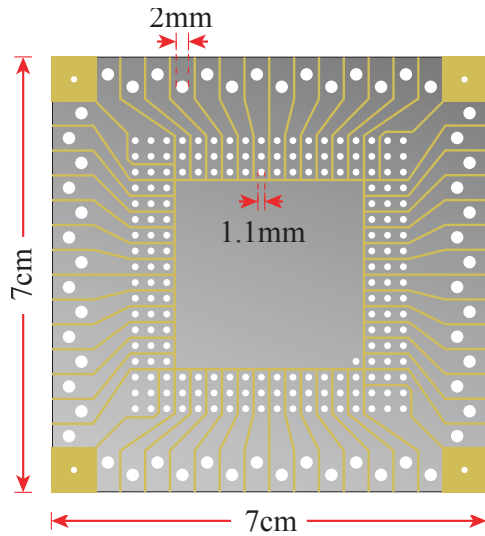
We have used standard electronics industry techniques for fabricating a vacuum compatible printed circuit board. The PCB design imprinted in the copper layer of the FR4 board gathers sets of three pin sockets and connects them together in a single copper strip. Each strip can then be accessed individually via copper barrel connectors in order to supply electric current to the atom chip wires.
